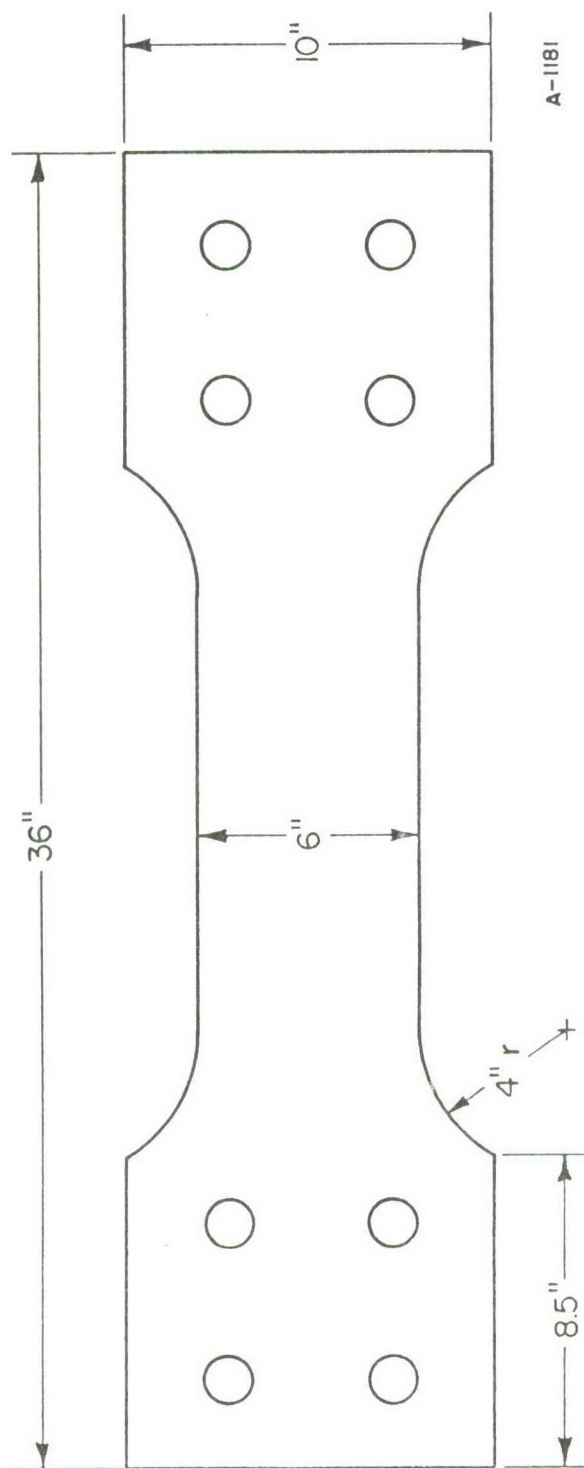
PLANFORM OF SURFACE FLAW TEST SPECIMEN
